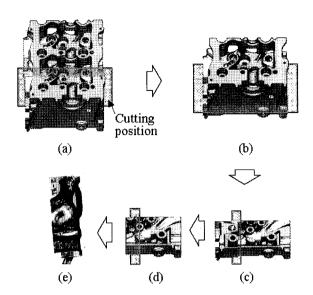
Parting out procedure for measurement of residual stress: (a) First cut; (b) Second cut; (c) Third cut; (d) Fourth cut; (e) Specimen at the final stage.
